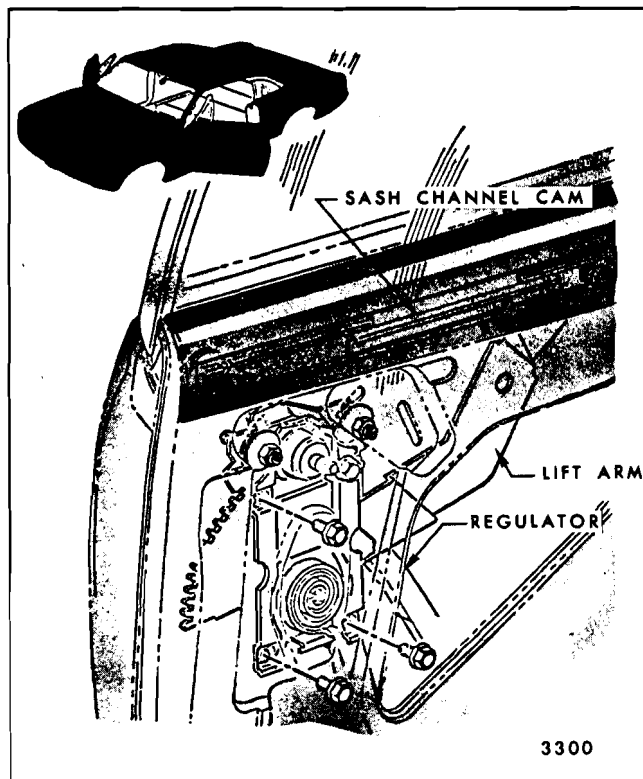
Rear Quarter Window Regulator Removal - "Z-37" Style
